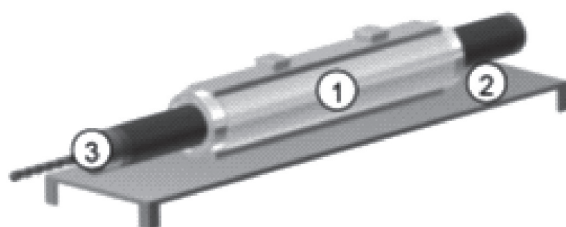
Exemplary application of rotary-linear motor in drilling machine: 1 – rotary-linear motor, 2 – stand, 3 – working tool
